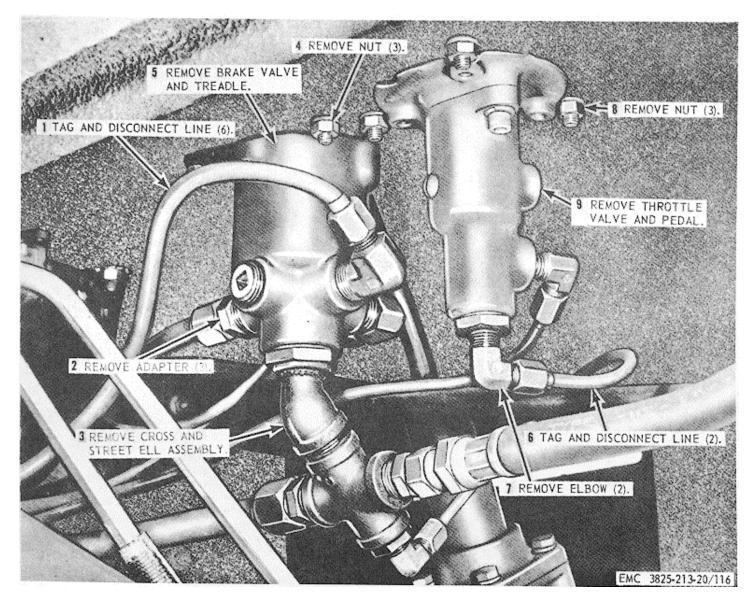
Accelerator pedal and brake treadle, removal and installation.
